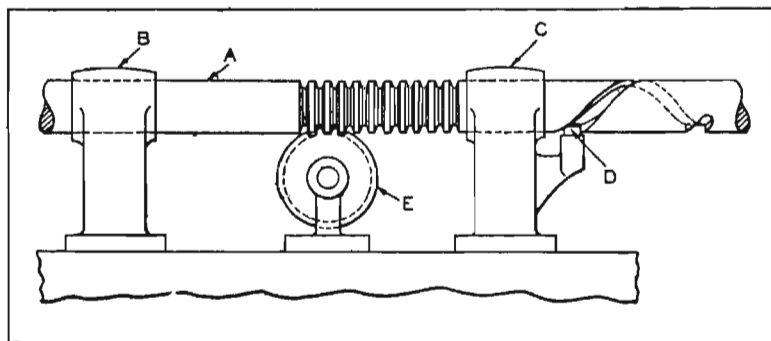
Mechanism for Reciprocating and Rotating Shaft *A*.
